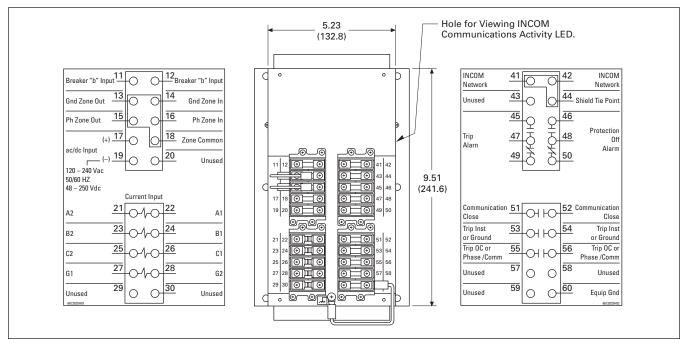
Rear View of Digitrip 3001 Drawout Outer Case Terminal Layout — Dimensions in Inches (mm)
